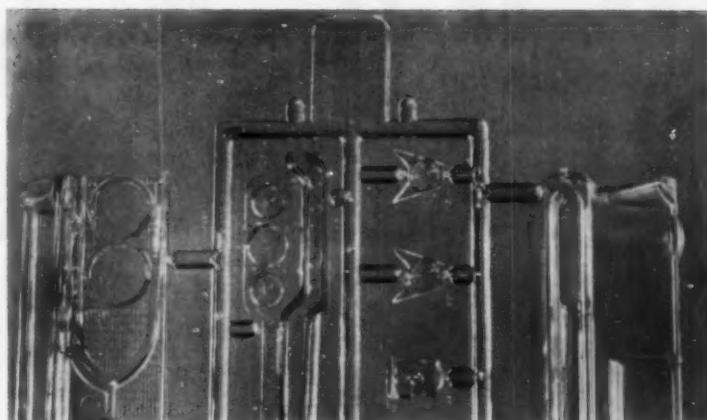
Injection molded polystyrene toy automobile parts shown with runner system still attached. Note double gating used on several parts to provide additional support for the parts when being handled in the metallizing process. Tab at top of posts used to rack the parts for metallizing was changed to provide additional strength (top) to avoid breakage in racking. Part at top has not yet been metallized.
